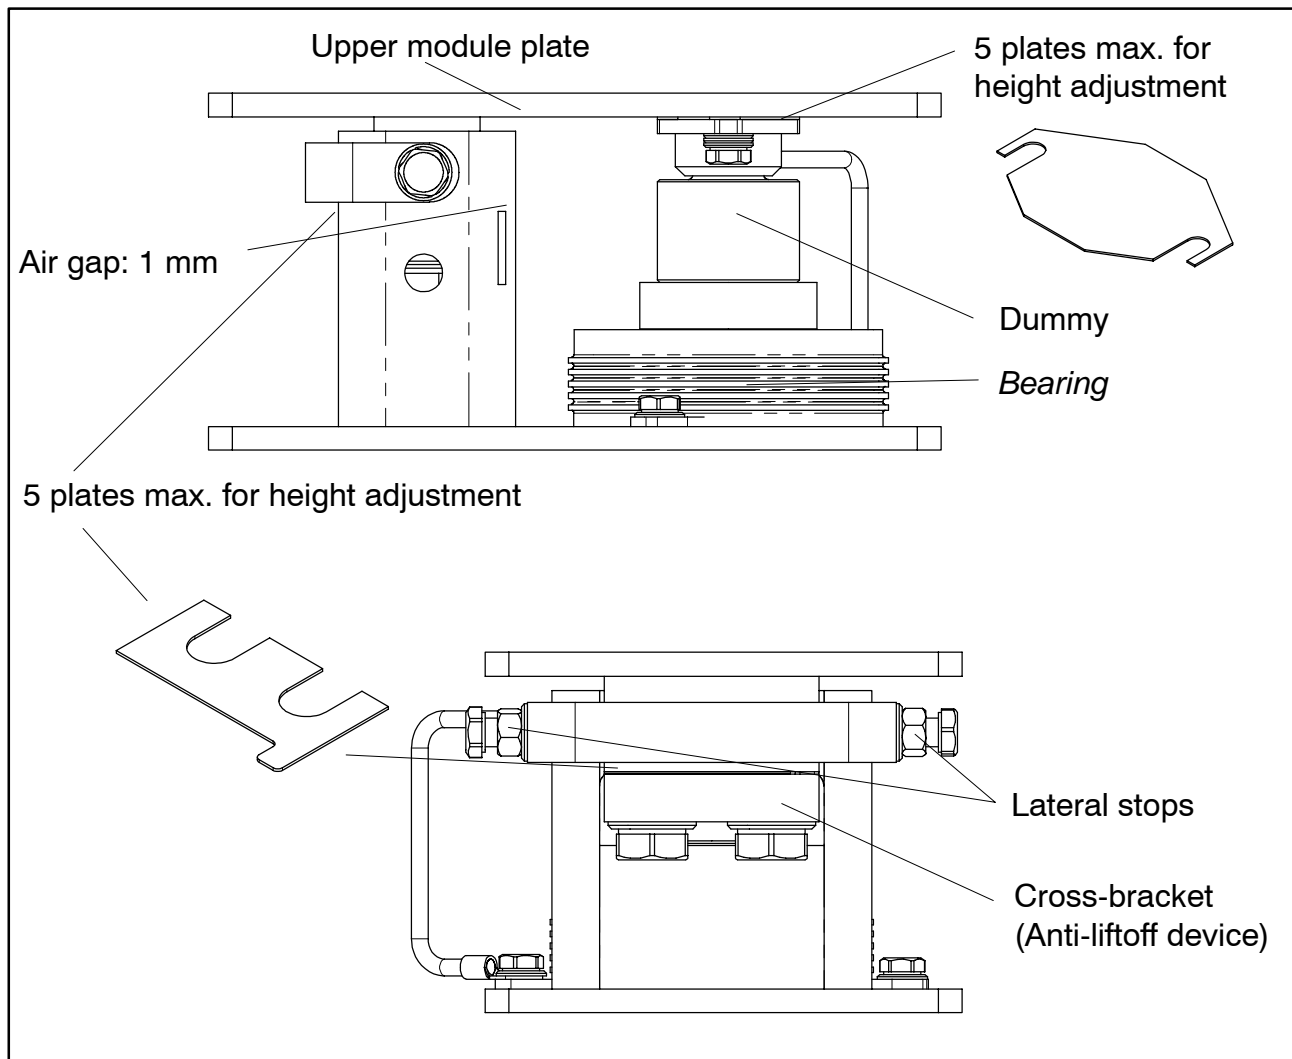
Fitting of the spacer plates with 10 t ... 33 t version
